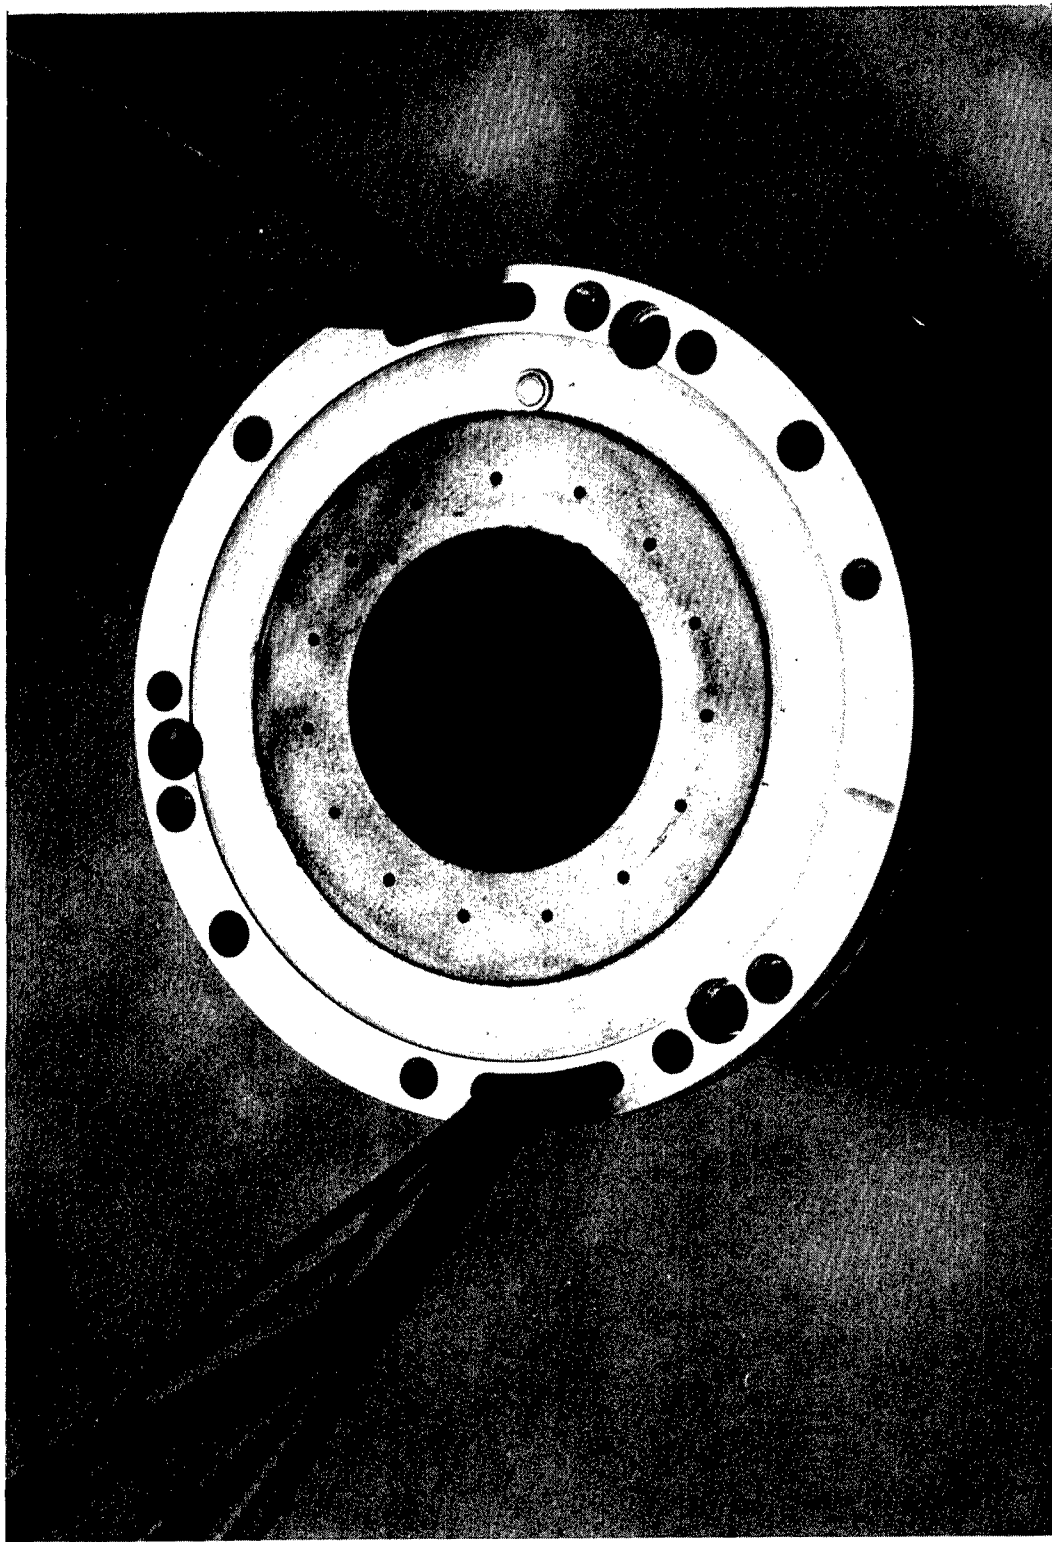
View Of The Reverse Hydrostatic Thrust Bearing
